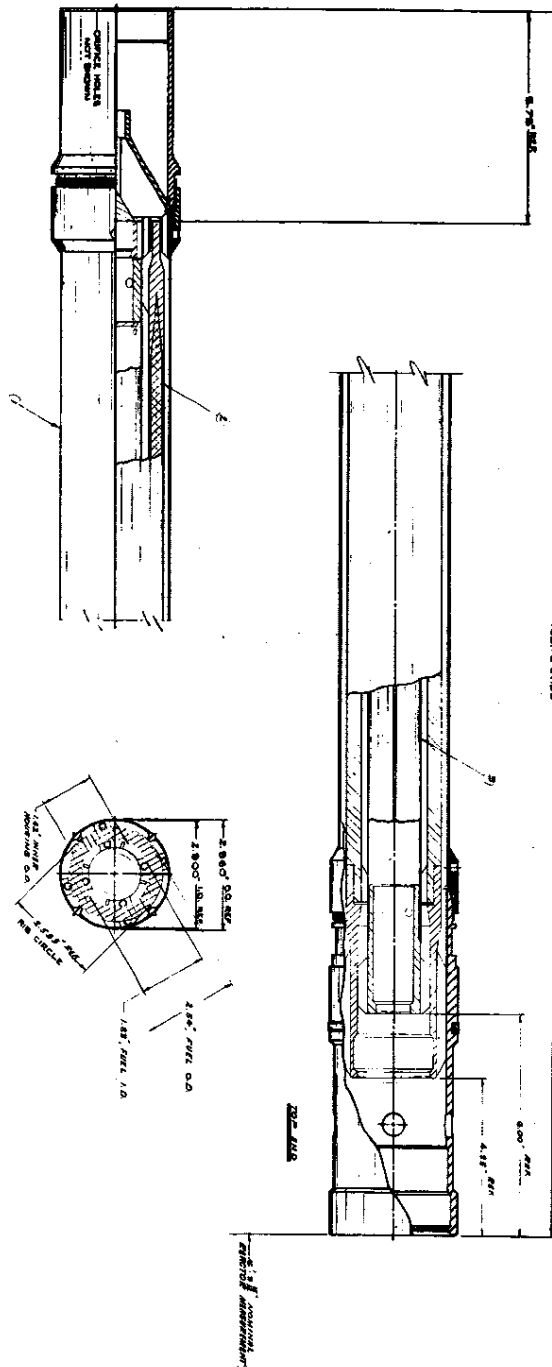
THORIUM - 1.4 wt% URANIUM FUEL ASSEMBLY
